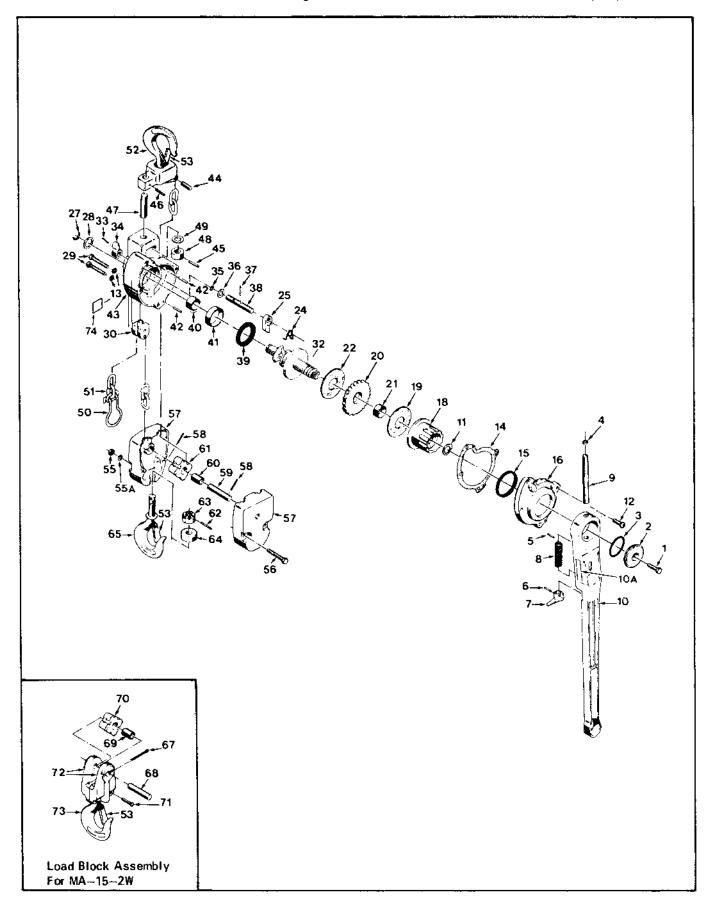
EXPLODED LLUSTRATION OF MODEL MA-15-2 AND MA-15-2W HOISTS
